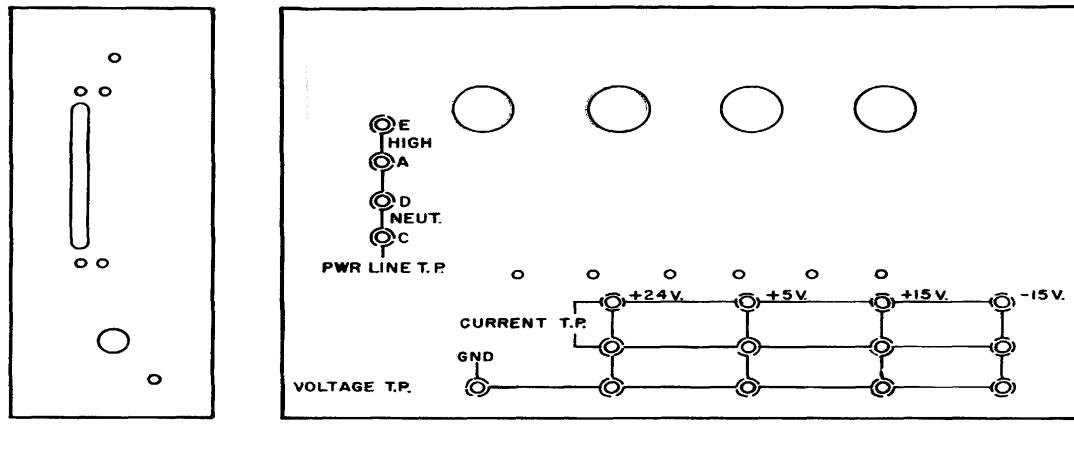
Alarm Monitor Power Supply Test Fixture, Bottom Chassis Layout.
